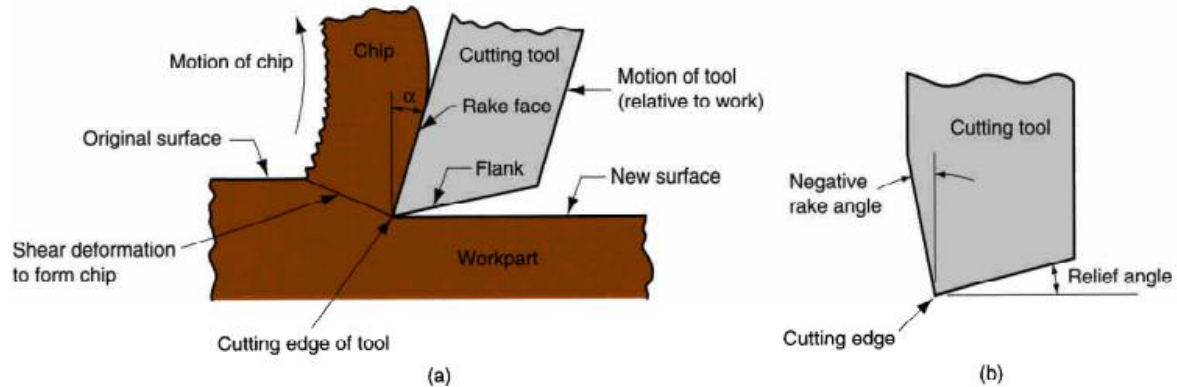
(a) Cross sectional view of the orthogonal cutting process (b) Tool with negative rake angle [7]
